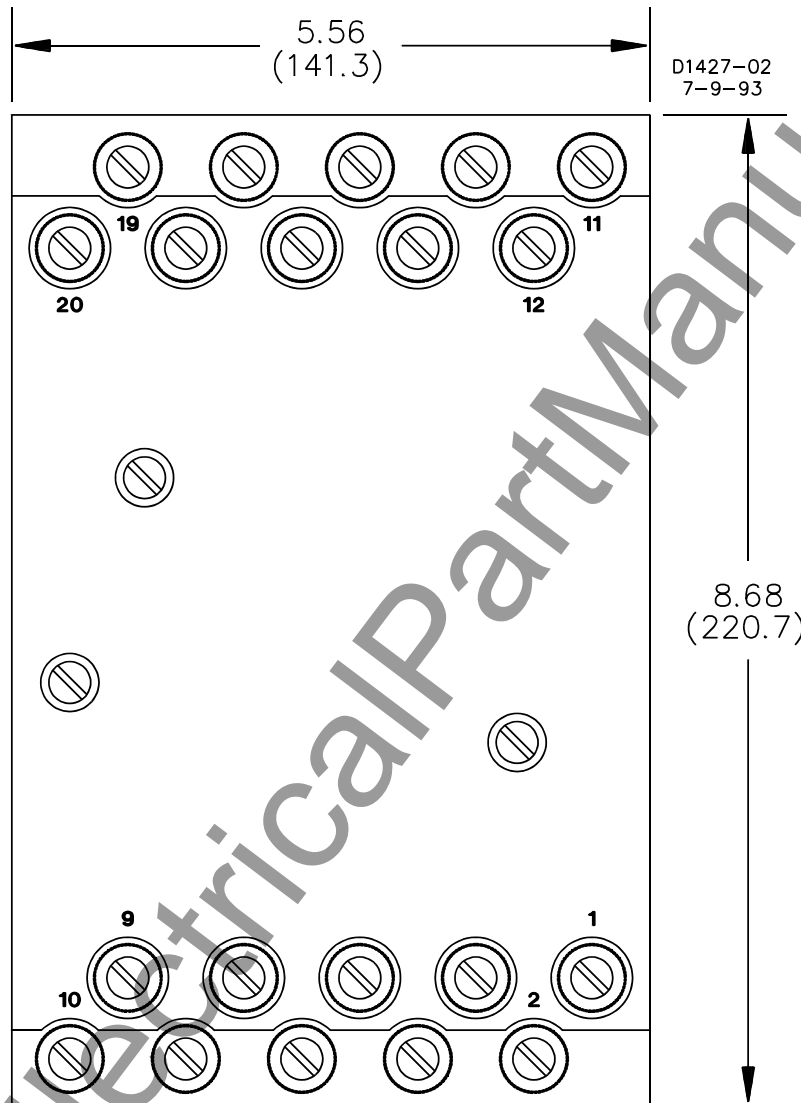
S1 Case, Double-Ended, Projection Mount, Outline Dimensions, Rear View
